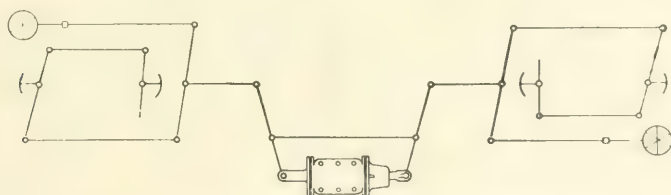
THE HODGE SYSTEM OF CAR BRAKE LEVERS
